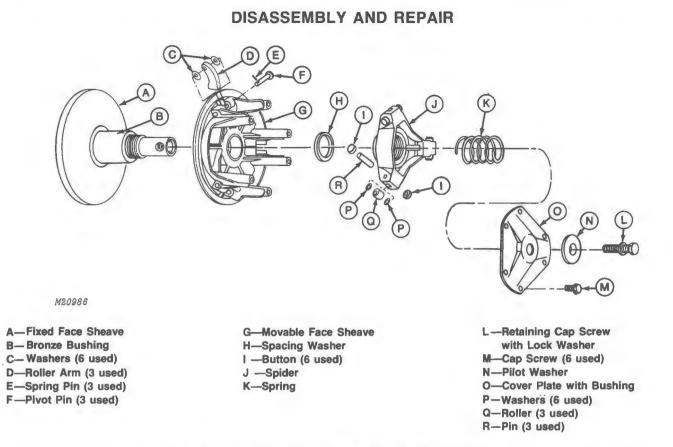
Exploded View of John Deere (Comet) 102C Drive Sheave
